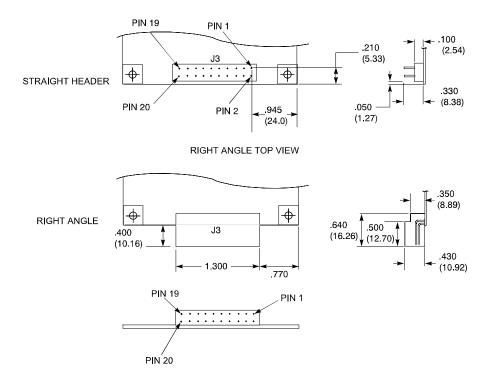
Receiver OEM Board Outline Drawing (VAR -XX1)
